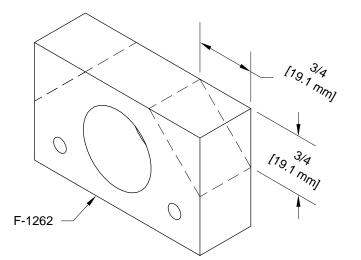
TRIMMING THE FLAP HANDLE BLOCKS
